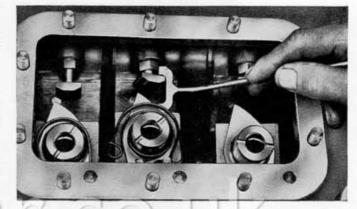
GAUGE APPLICATION. This shows where the gauge should be applied.
